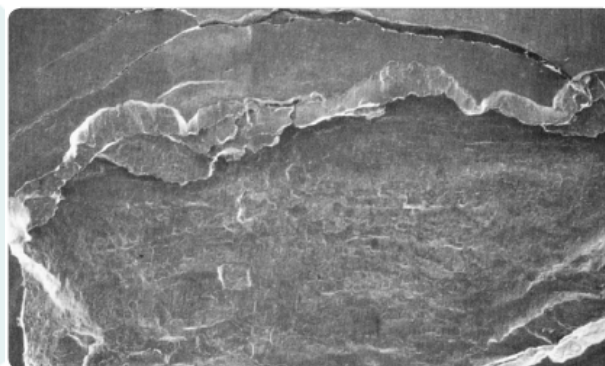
Initial subsurface spalling on the inner ring of a deep groove ball bearing Figure-8: Subsurface spall on an inner ring raceway
